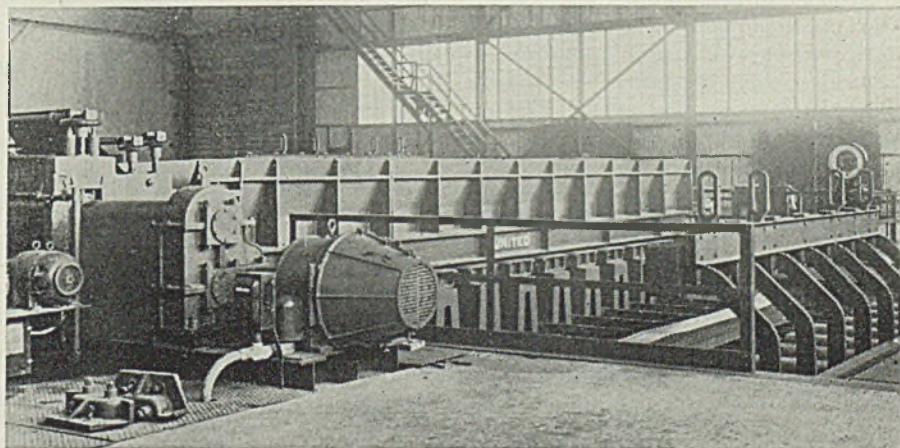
The sheet piler at end of hot strip mill has a capacity of 15 tons. A chain conveyor moves packs horizontally across a recording scale to the crane deck
